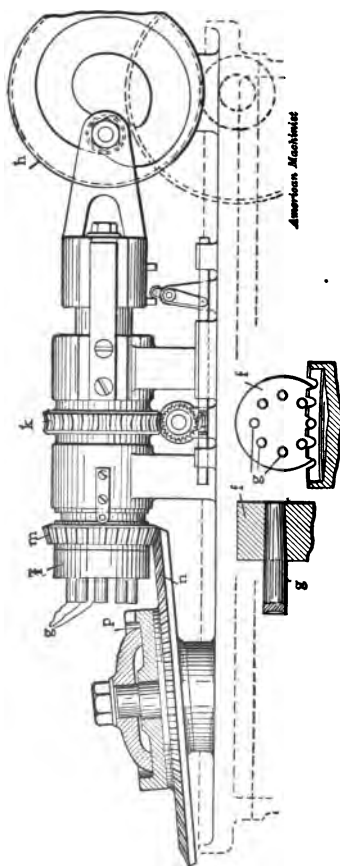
Copeland's Generator for Bevel-gears to Mesh with Pin Wheels.
